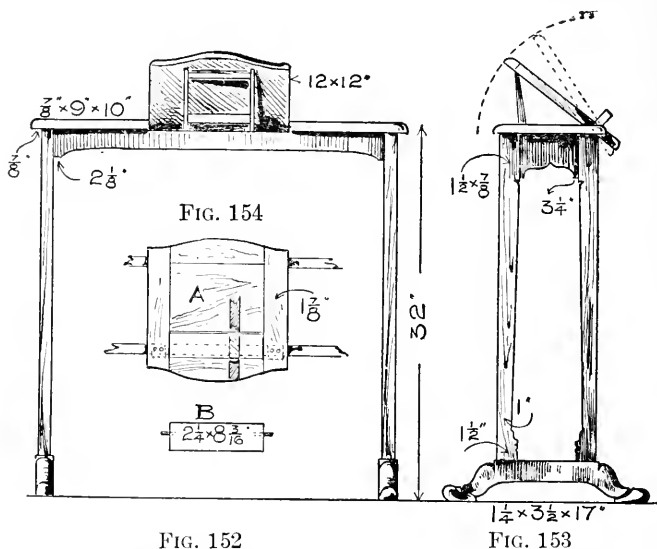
, 153 and 154.—Elevations and Details of a Reading Table.
